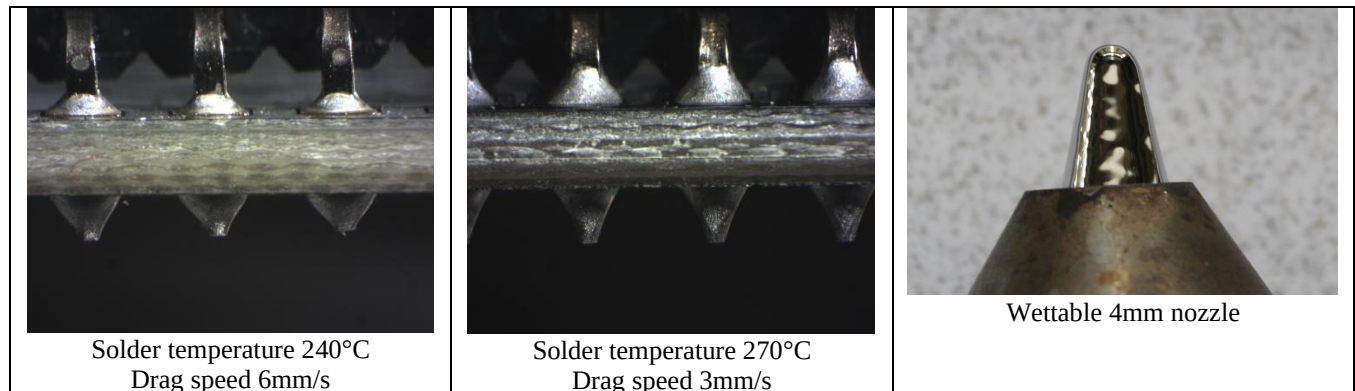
Soldering is good at temperatures equal or higher than 240°C for test board 1.
